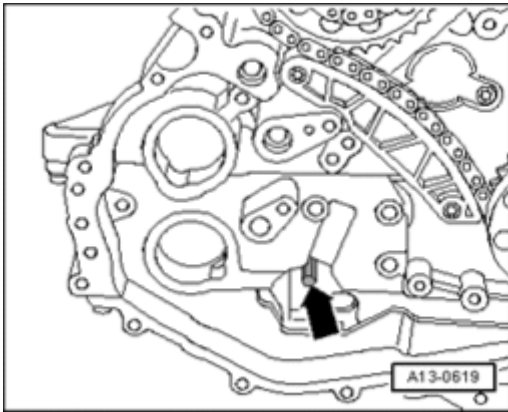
Removing/Installing Drive Shaft For Oil Pump
